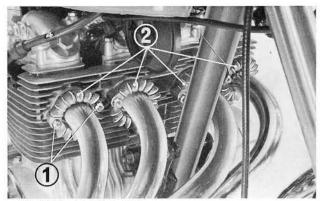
① Joint nut ② Exhaust pipe joint
